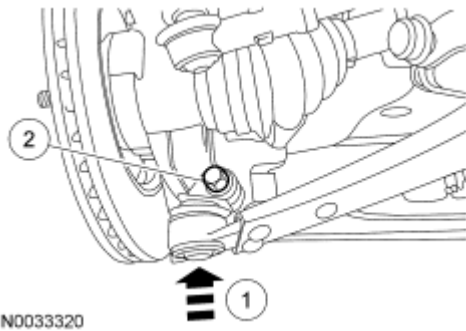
Connecting Suspension Arm Ball Joint And Identifying Bolt
